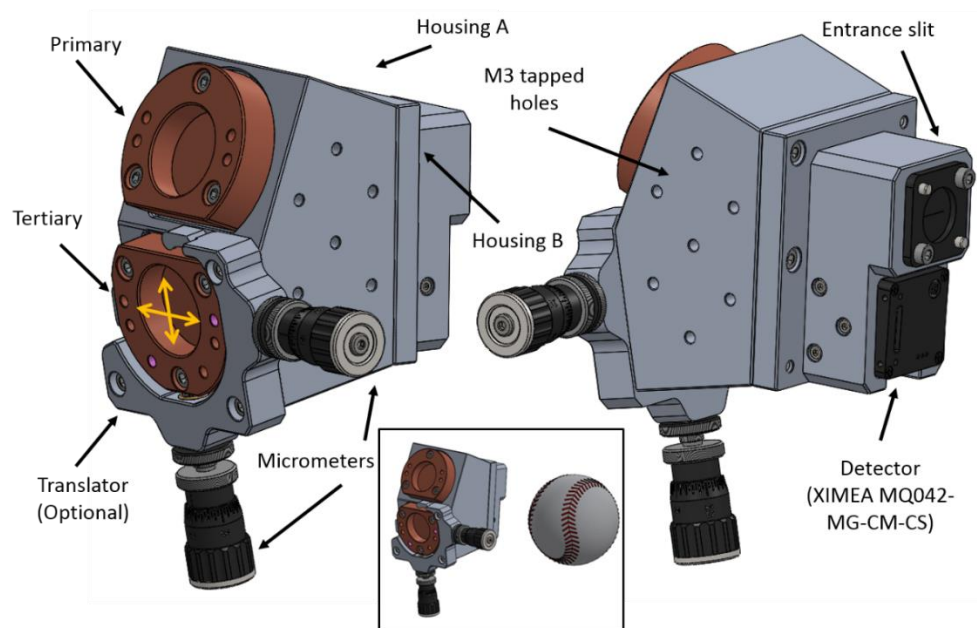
Imaging spectrometer optomechanical design. Inset depicts completed assembly with baseball (75 mm diameter sphere) for size reference.
